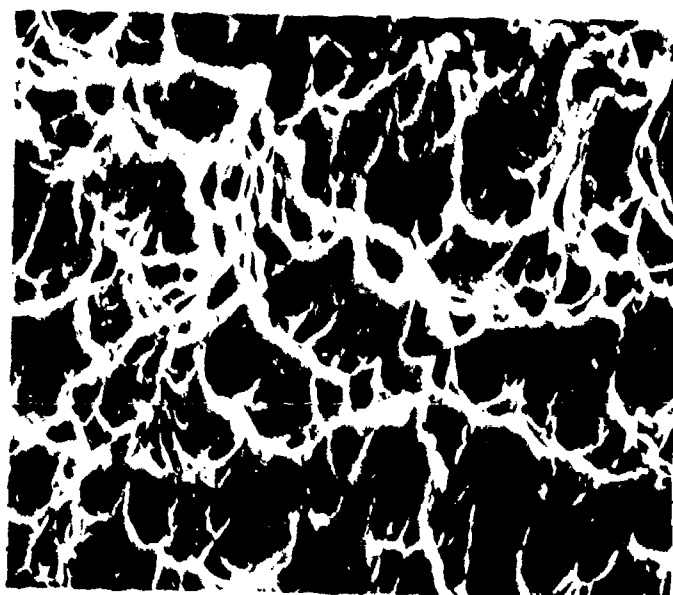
Tensile overload region of a fatigue fracture surface of an A-514 weldment containing LOP, 3250x.
